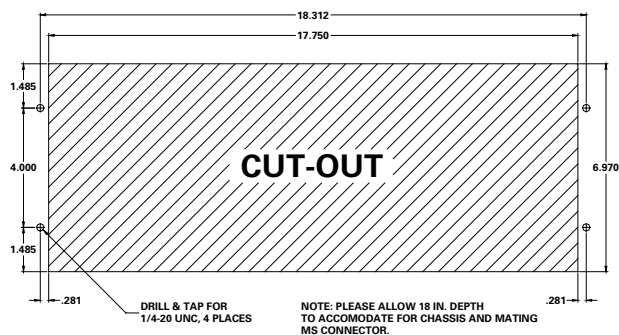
RACK MOUNT COMMUNICATOR MOUNTING DIMENSIONS
